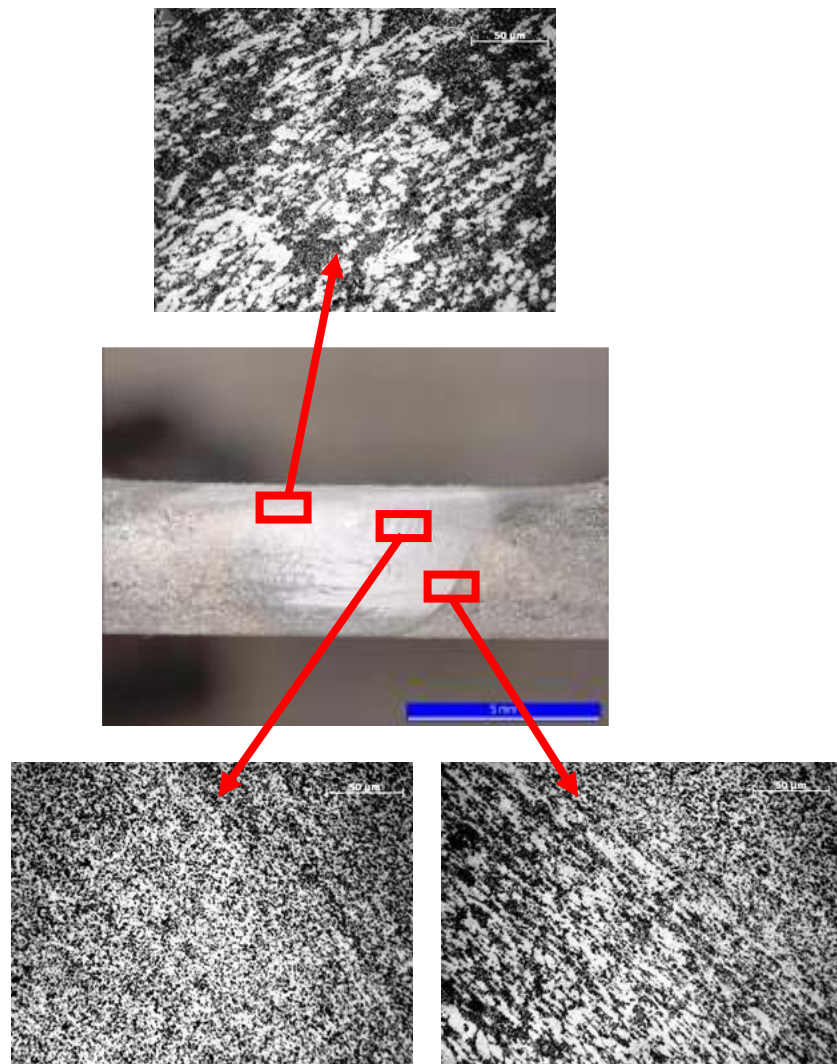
FSW welding seam on a 4 mm wall-thick plate in Silafont[®]-36.
